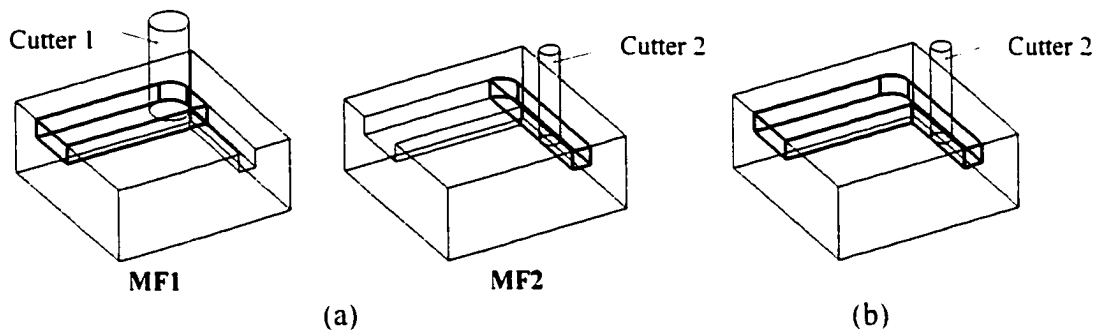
An example of undesirable merging of features due to cutter sizes: (a) two open pockets in an SFM with different cutter sizes; (b) merged feature.
